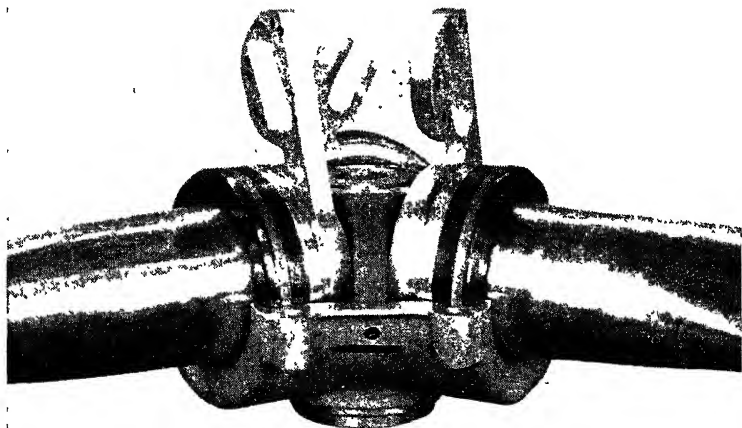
Partly assembled Hamilton Standard constant-speed propeller
